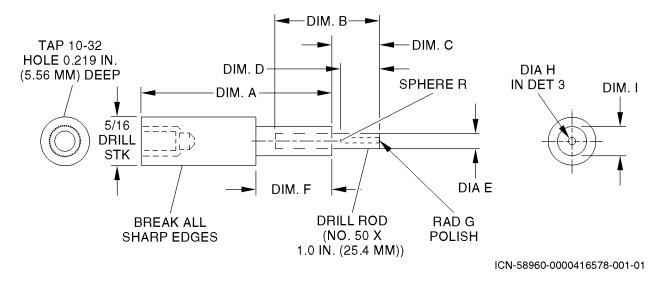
Contact Seating Inspection Kit Contact Adapter, T3009406-5
